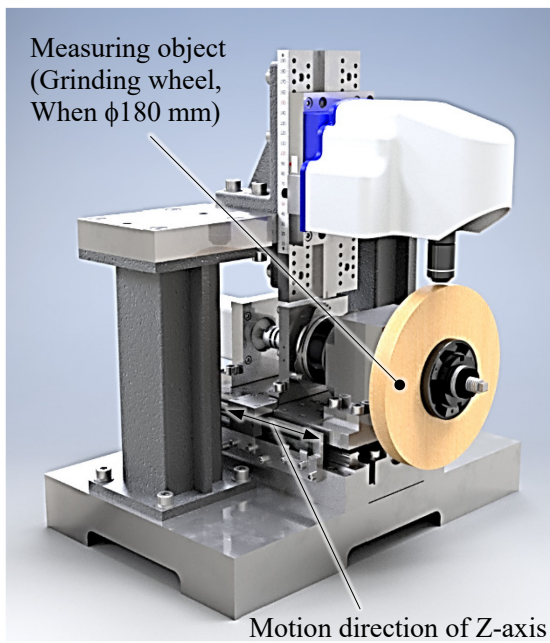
Schematic diagram of grinding wheel surface shape measuring device
